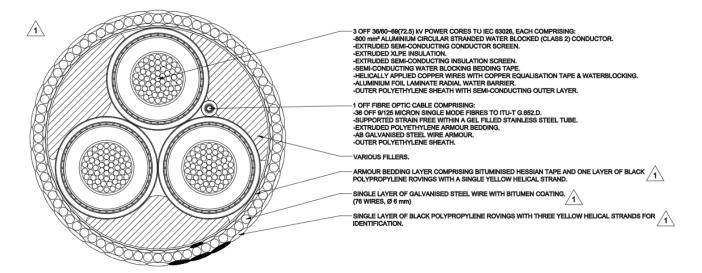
SUBMARINE CABLE – Cross section Drawing of the 800 mm² Array Cable
